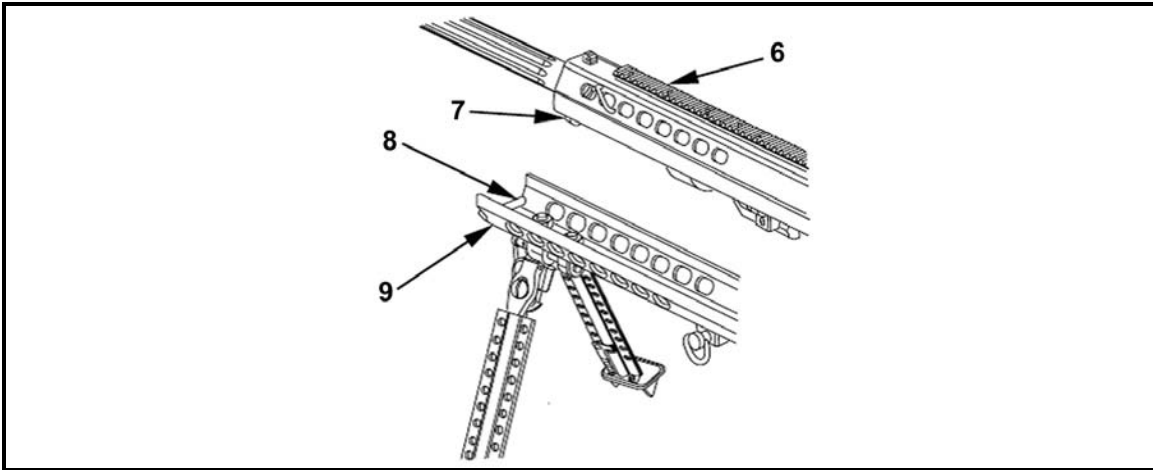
Lifting the upper receiver assembly clear of the lower receiver assembly.
